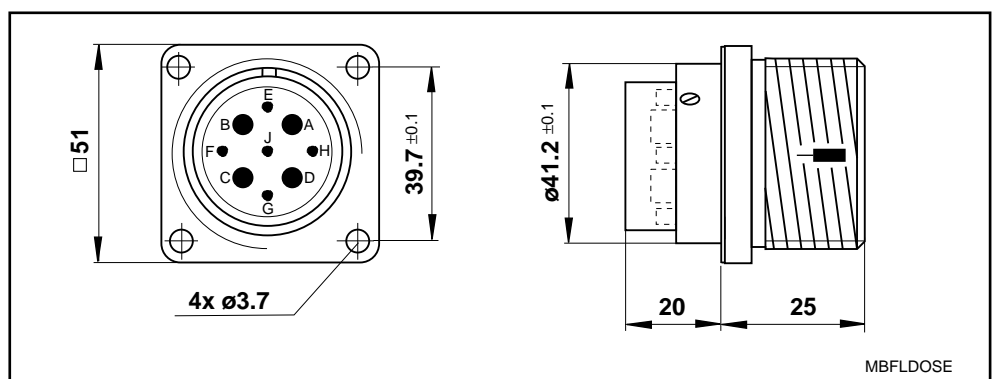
Flange socket IN192/25L from INDRAMAT
